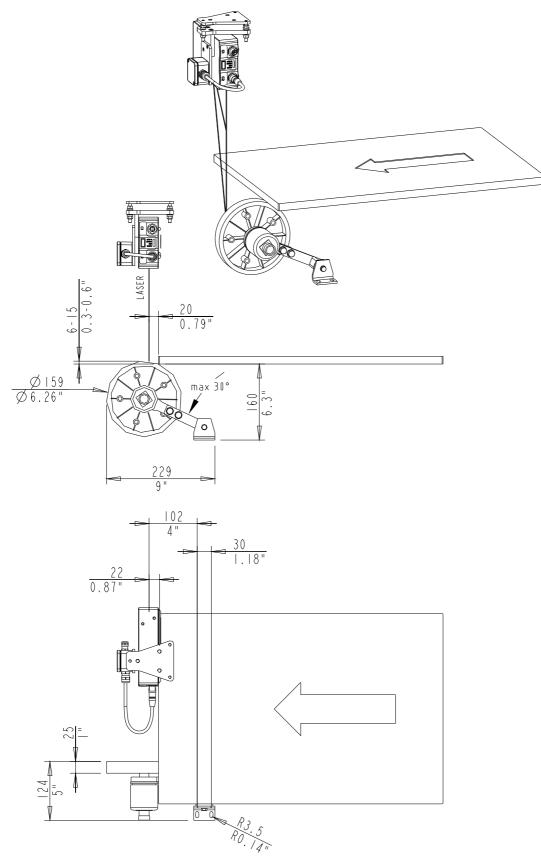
The measurement wheel installed under the conveyor and the PreciCura laser sensor
